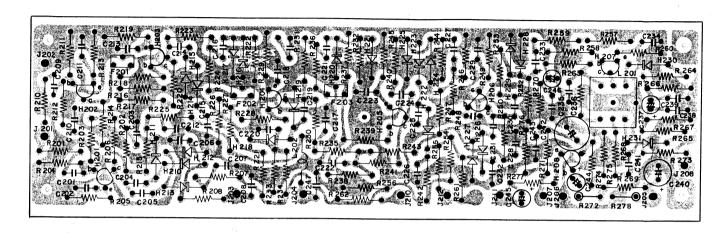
FM 1F Amplifier Assembly P200 Component Locations
